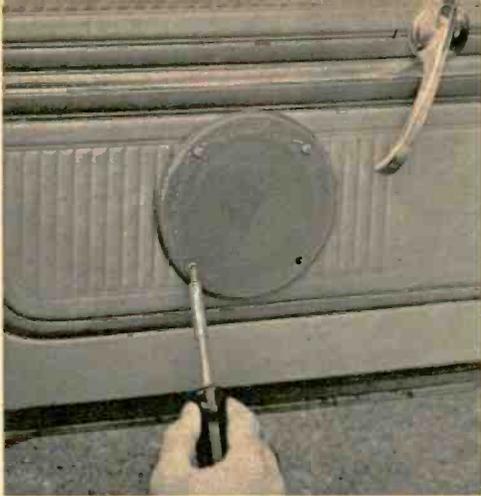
After you have connected the wires to the speaker, place the grille over the speaker and mount the assembly in door with supplied screws.
